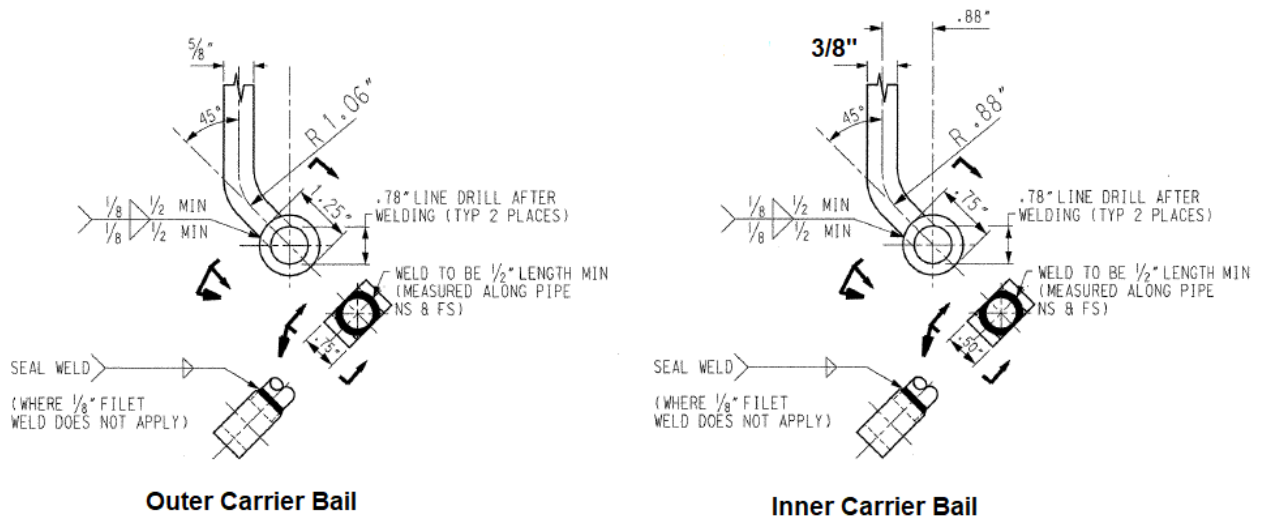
Dimensions for Inner Lug for Lifting Bail Attachment Point
